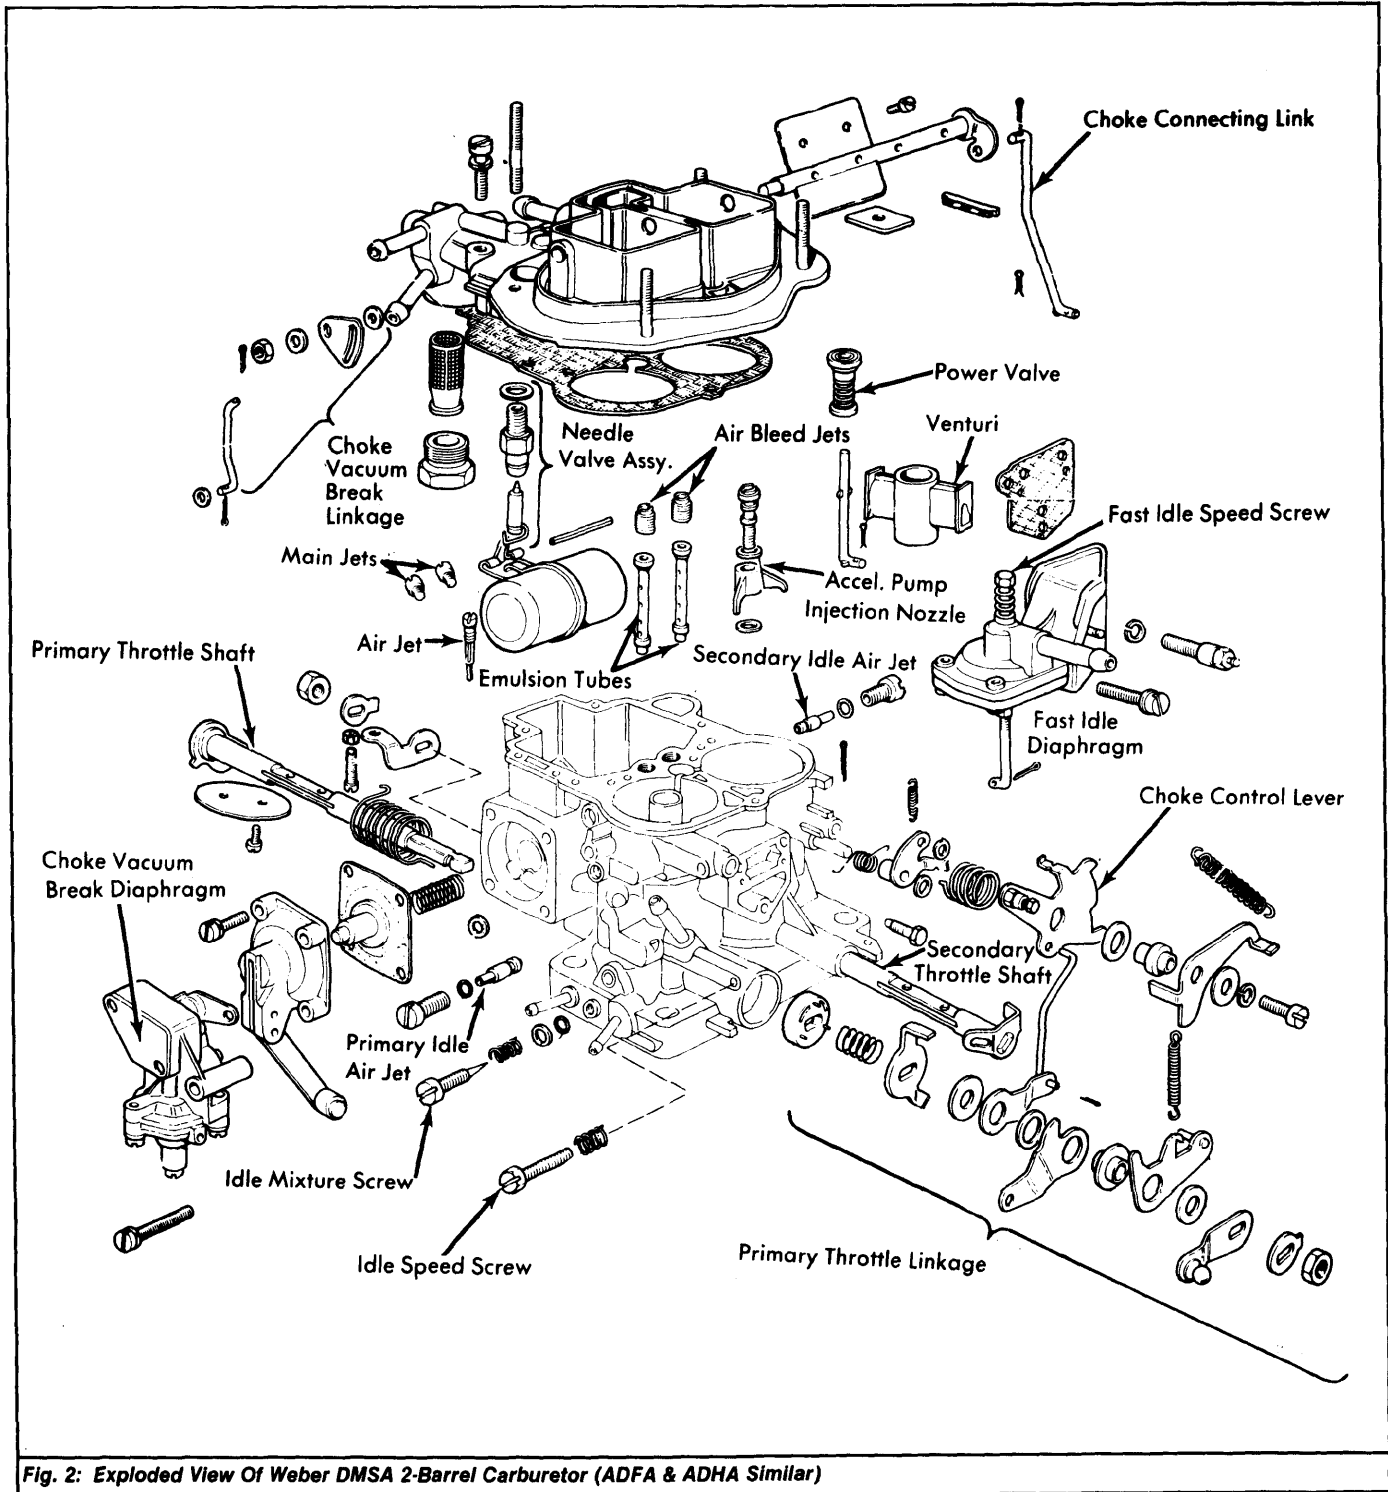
Exploded View Of Weber DMSA 2-Barrel Carburetor (ADFA & ADHA Similar)
